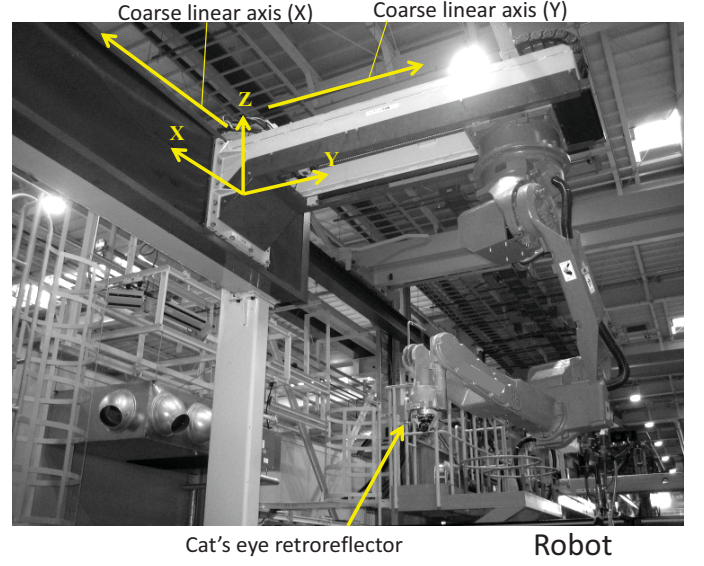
Experimental setup (the robot moved by coarse linear axes).
